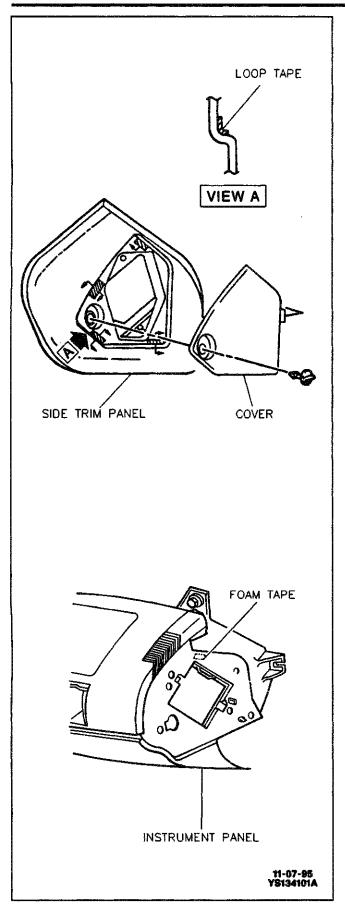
Instrument Panel—Fuse Box Rivets and Cover
